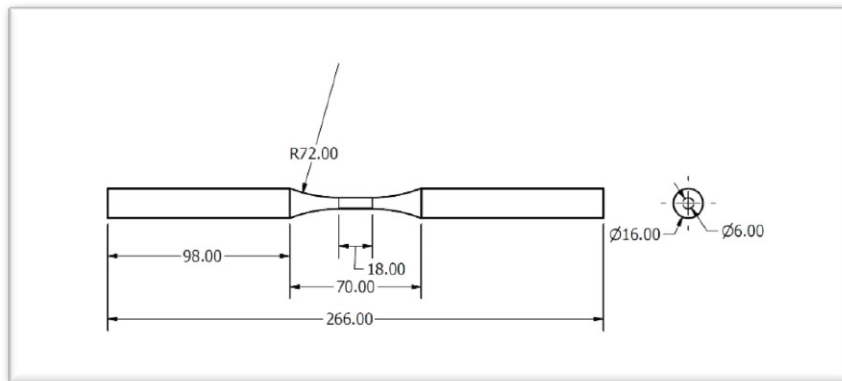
Specimen geometry for fatigue test in air and corrosive environment
